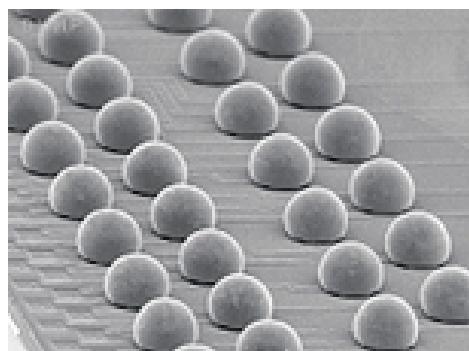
The SEM image of the reflowed solder bumps on the chip pads. (Source: [www.samsung.com](http://www.samsung.com))
